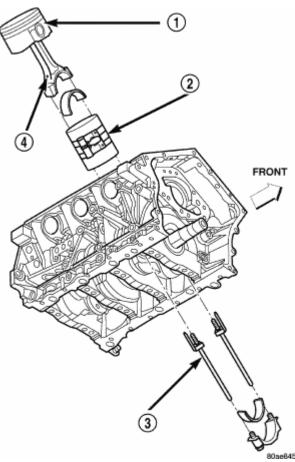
Piston & Connecting Rod Courtesy of CHRYSLER LLC
